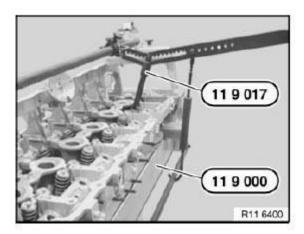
Identifying Special Tools Courtesy of BMW OF NORTH AMERICA, INC.
